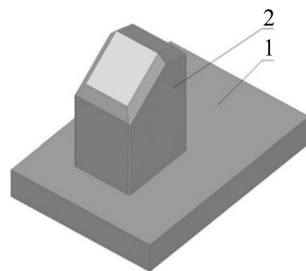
31887-NSB non-folding, stationary stop, welded to the platform frame [12]:
